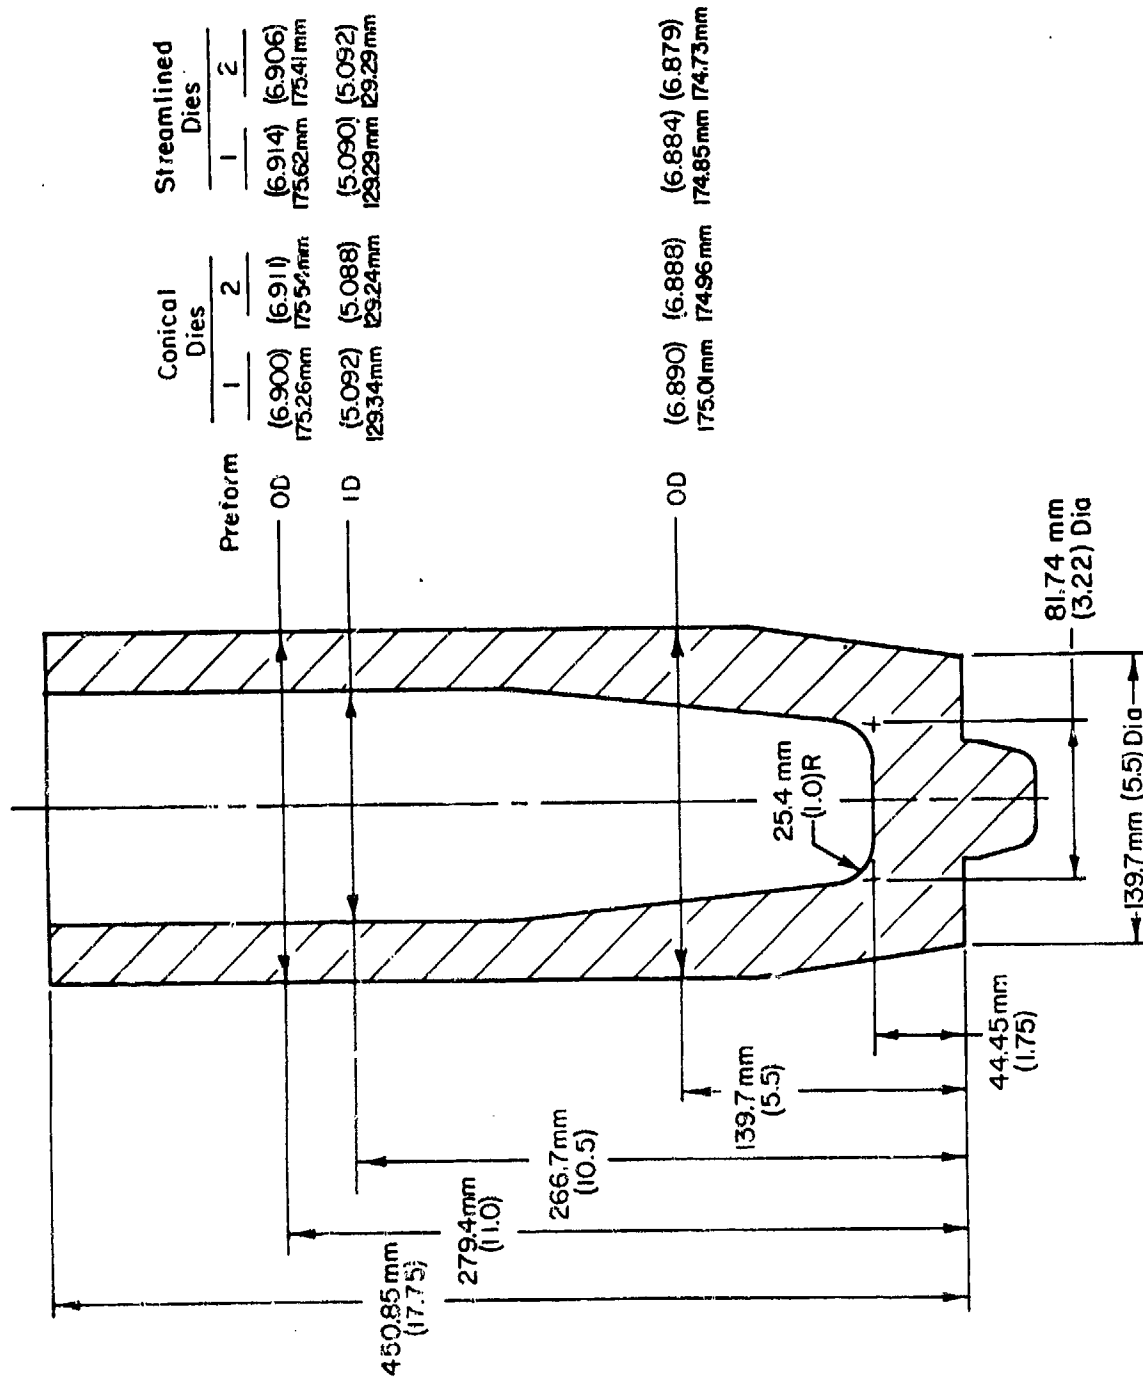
Dimensions of preforms for hot drawing of M107 shell.
